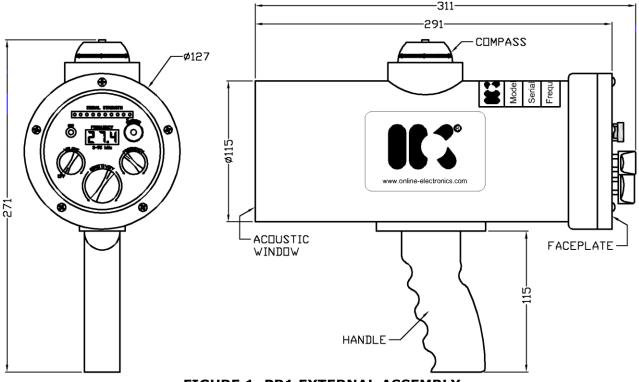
PR1 EXTERNAL ASSEMBLY
